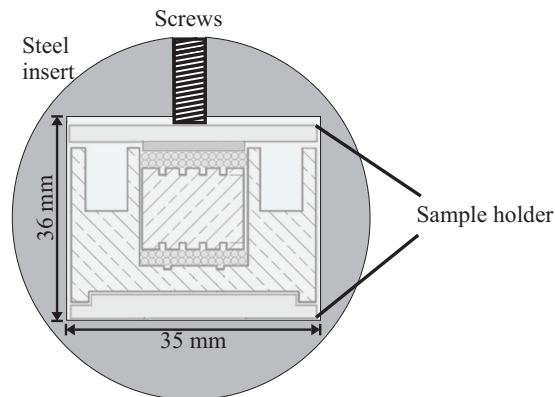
Cross-section of the stainless steel sample insert, with the sample holder clamped inside.
